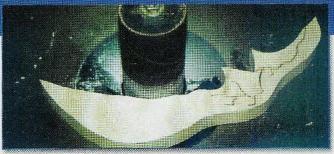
Sand the cut edges on an oscillating spindle sander or a drum sander mounted on a drill press. This will ensure a 90° angle for fitting.
